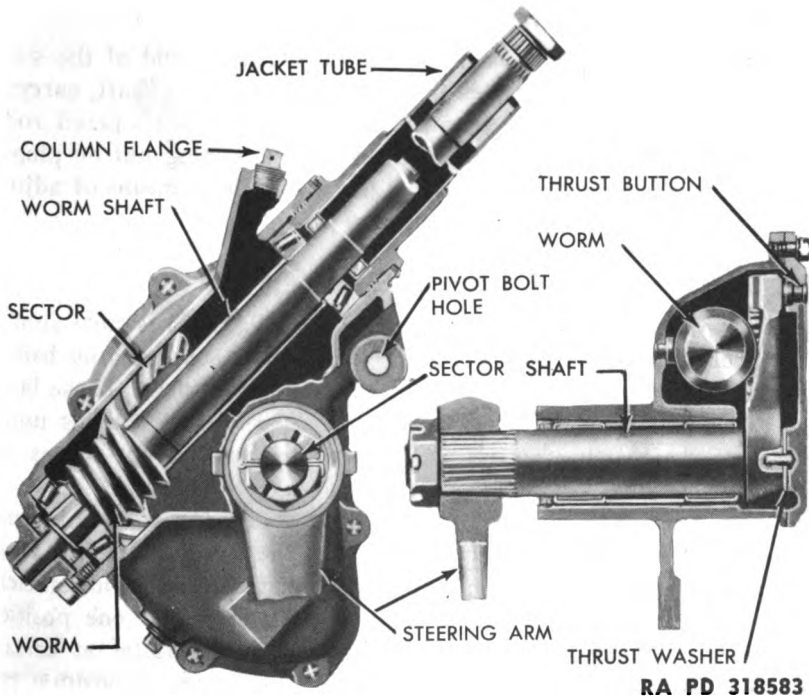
Archimoid-type Worm and Sector Steering Gear
